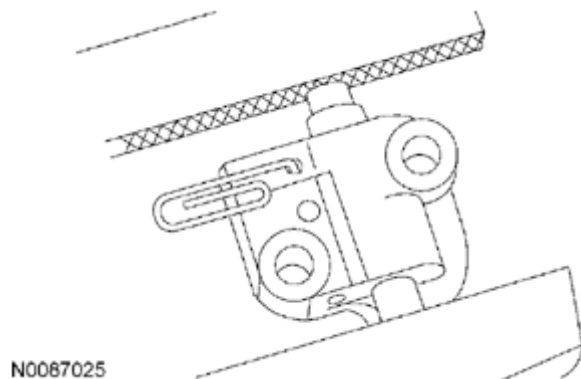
Retaining Tensioner Piston With 1.5 mm (0.06 in) Diameter Wire Or Paper Clip
